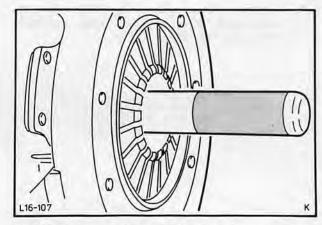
Fit pressure plate and clutch disc using centering tool 21-044/21-080
